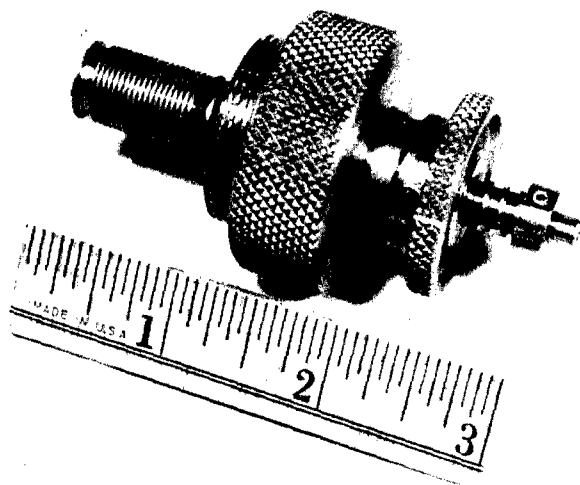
Redesigned Spiral Flow Regulator Integral With a Pressurized Fuel Tank (not shown)
